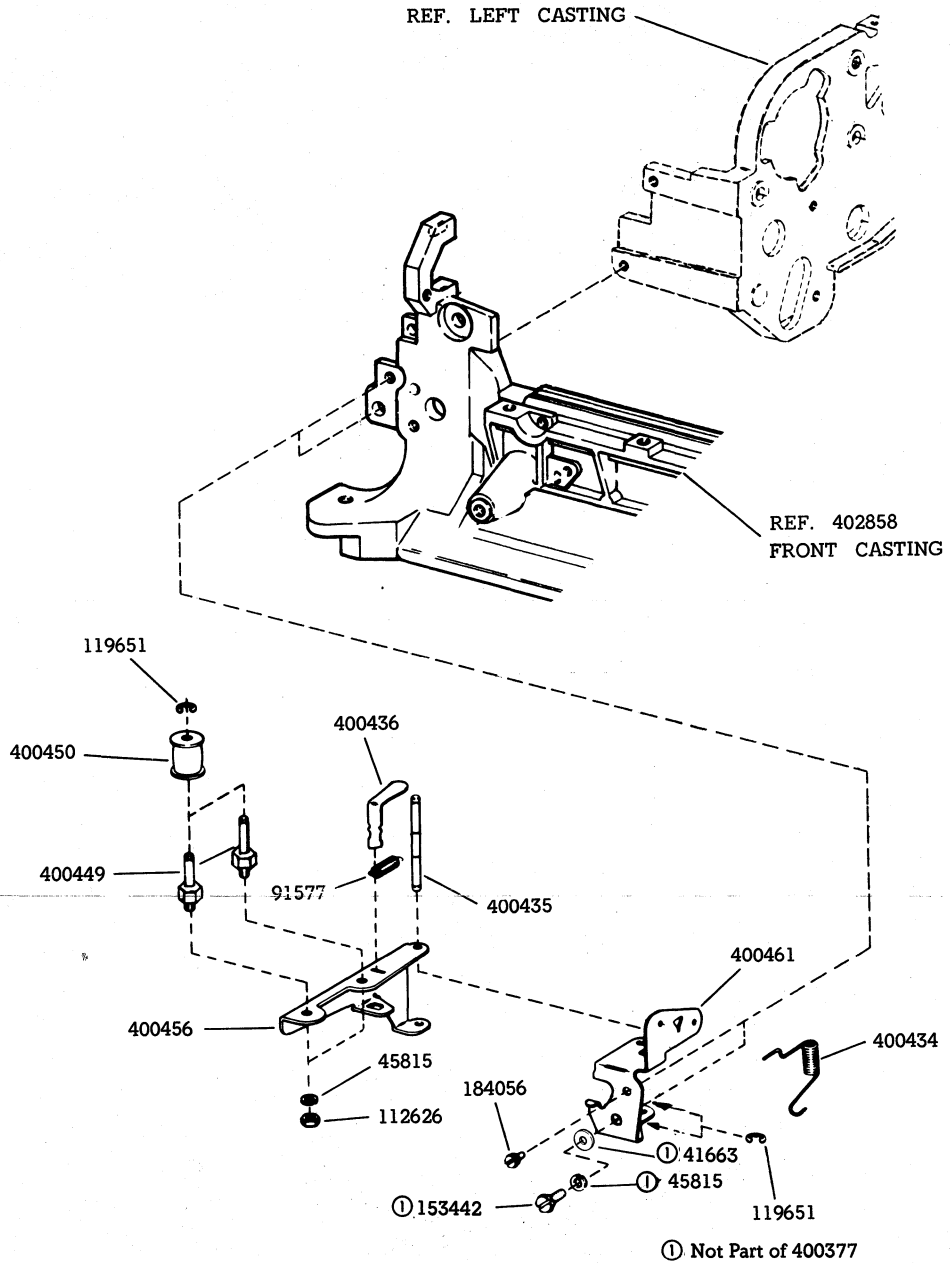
Front Casting Assembly (Friction Feed 40P101 Late Design) (Cont.)
